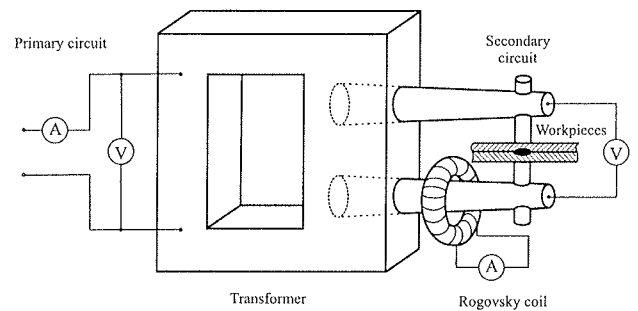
Schematic of resistance spot welding machine with a measuring chain for measurement of welding parameters.
